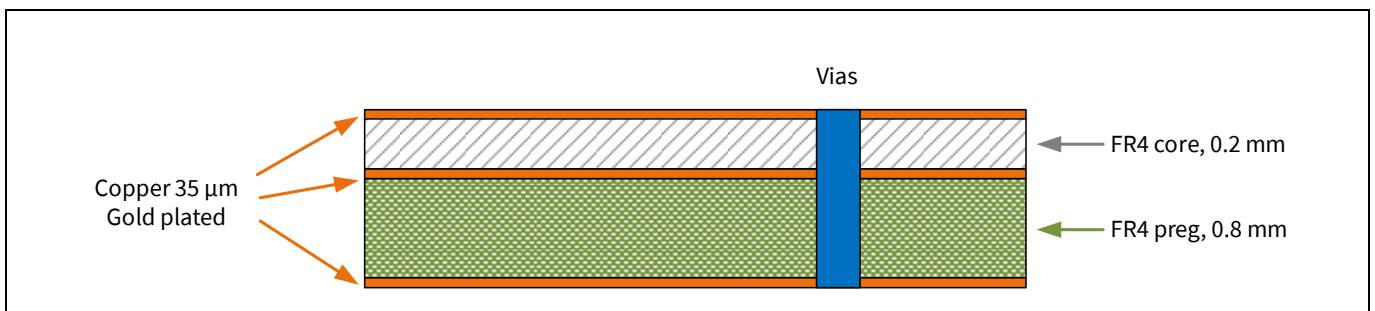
PCB stack information for the evaluation board with PCB marking M100511
